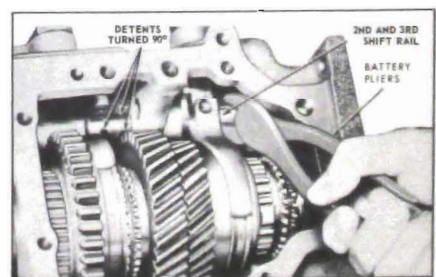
Rotating 2nd - 3rd Shift Rail
